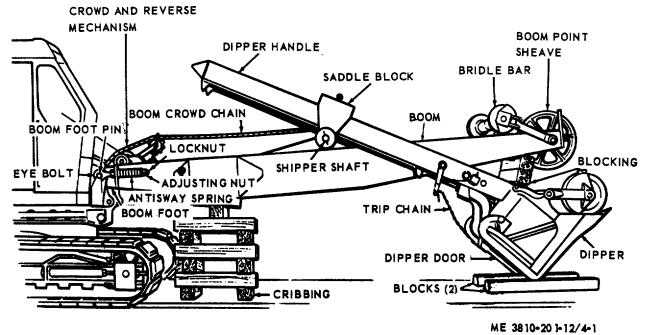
Shovel front end attachment, cribbed for removal or installation.
